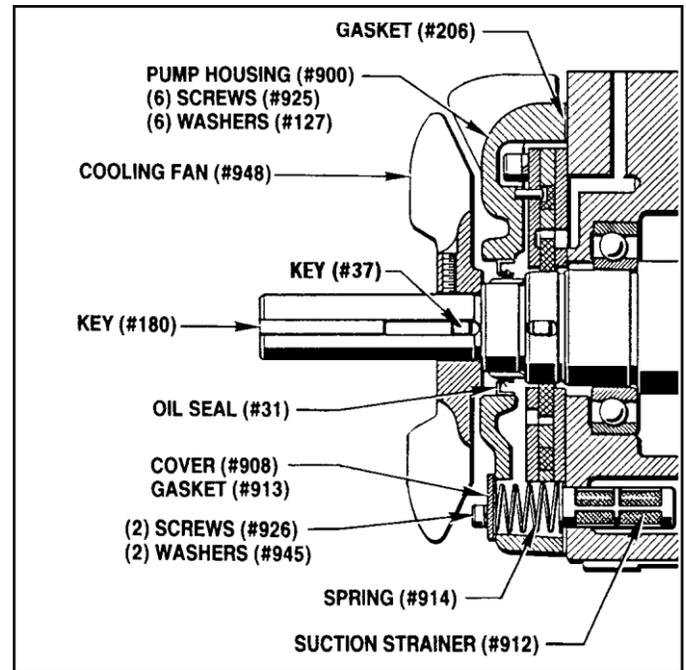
Pump Housing, Suction Strainer & Cooling Fan
